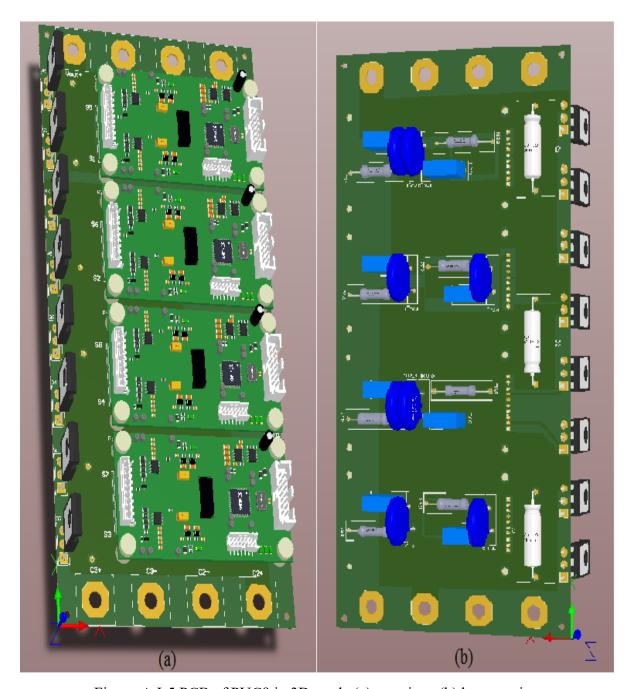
PCB of PUC9 in 3D mode (a) top view, (b) bottom view
